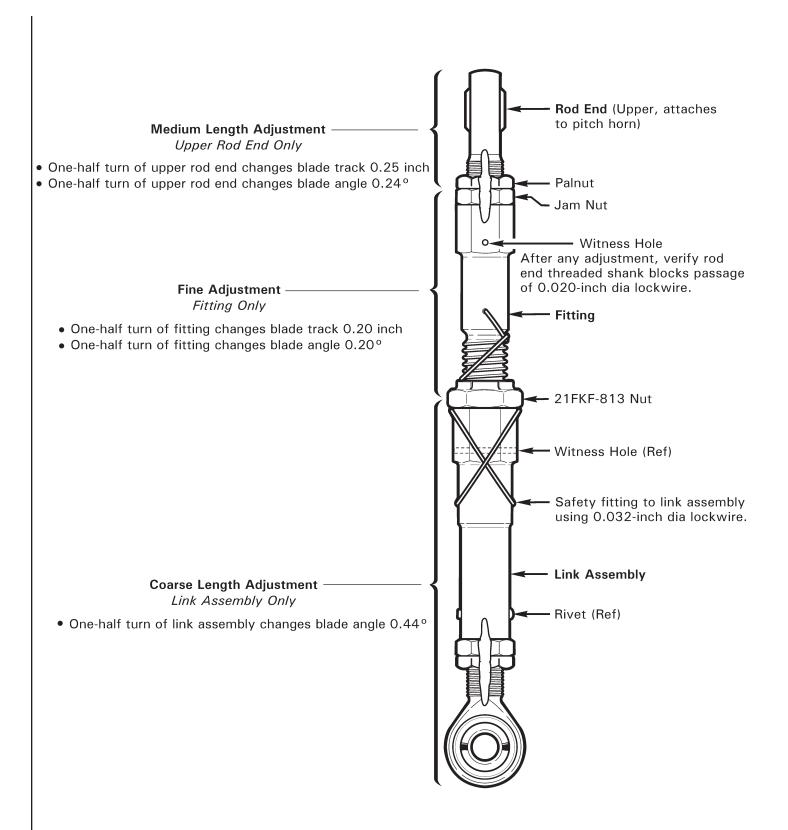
B C258-1 MAIN ROTOR PITCH LINK
